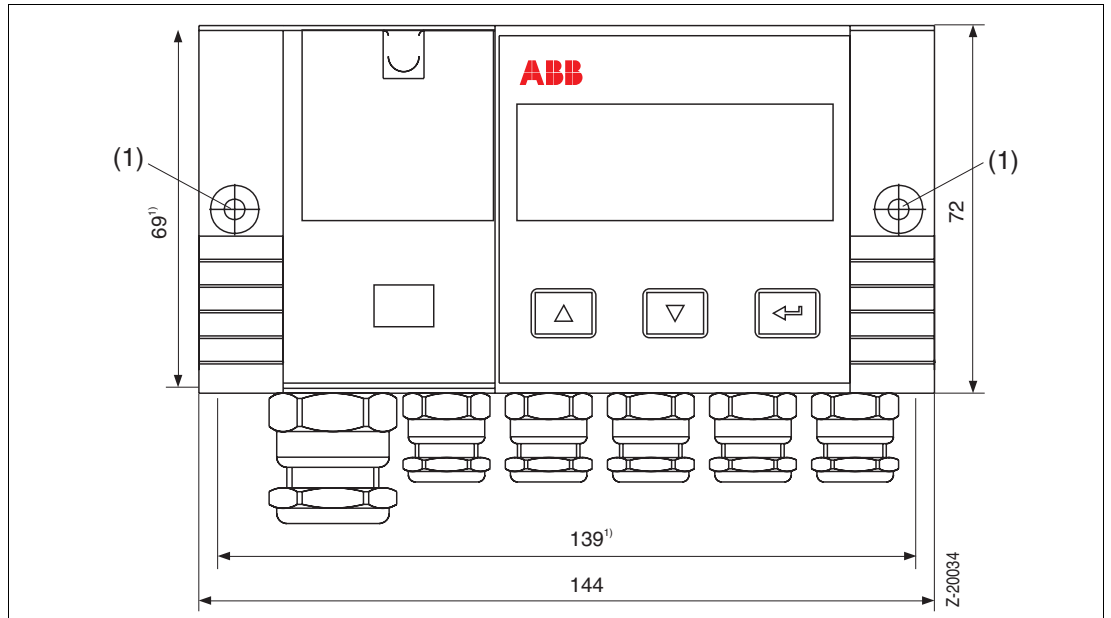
Dimensional drawing, front view, covers removed (all dimensions in mm)
